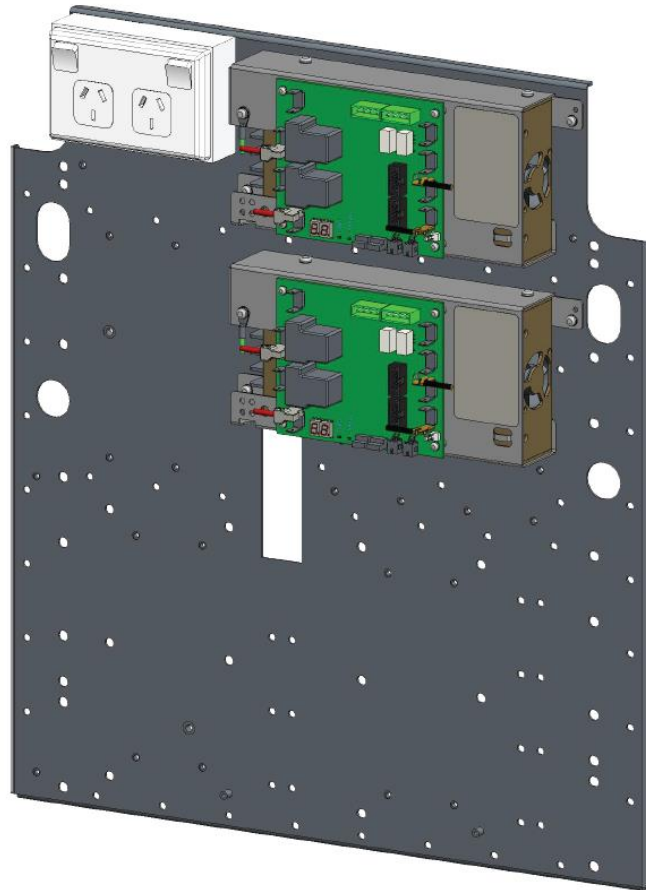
14A PSE Mounting on T-Gen2 Grade 2 Gearplate
